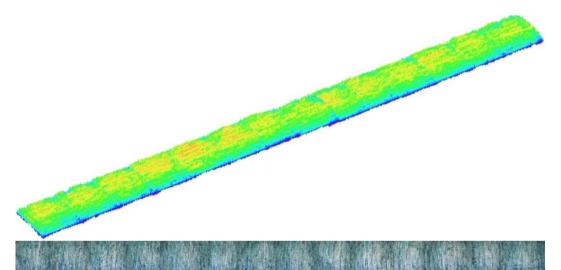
The 2D and 3D images of the surfaces machined with the high-speed milling cutter (the eighth mode).
